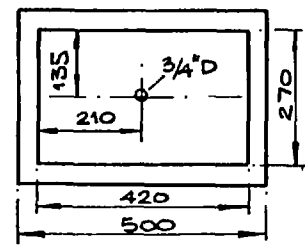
FOUNDATION PLATE OF THE TEST SECTION.
